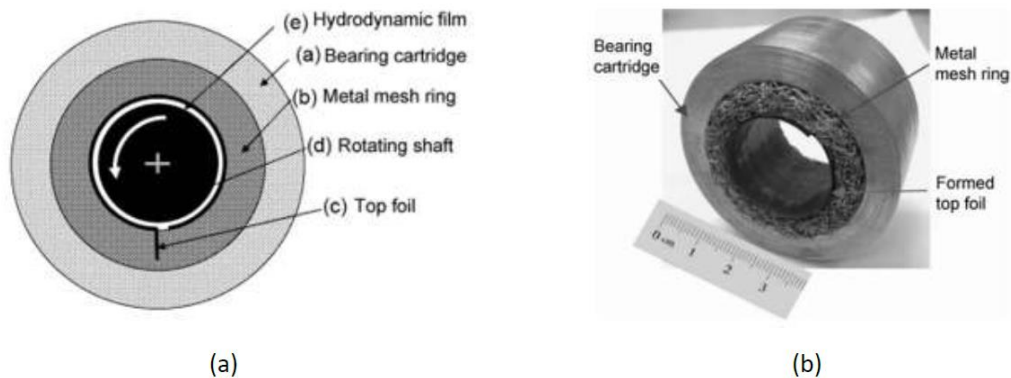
(a) schematic representatin of metal mesh foil bearings, (b) photograph of a metal mesh foil bearings [47].
